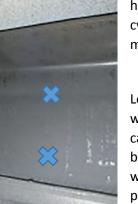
Locate the first Ford cross-member (between the frame rails) after the rear axle's rear leaf spring perch bracket. Hold the rear inside mount bracket (#M29352) up to the frame as shown. Ensure the bracket is tight to the flanges of the Ford frame for structural support. Rear cylinders should always be within 60" from the rear axle. Care to not interrupt departure angles when placing rear cylinders. Departure angle, imagine placing string from center of rear tire making contact with the ground and the furthest and lowest point of the vehicle (typically hitch receiver or bottom of rear bumper). Always position as close to rear axle as possible and up high enough to not interfere with departure angle.
